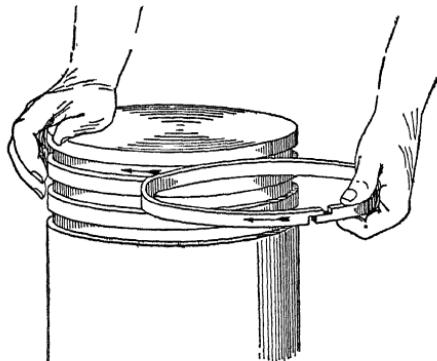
Testing Fit of Piston Ring in Ring Groove by Rolling
